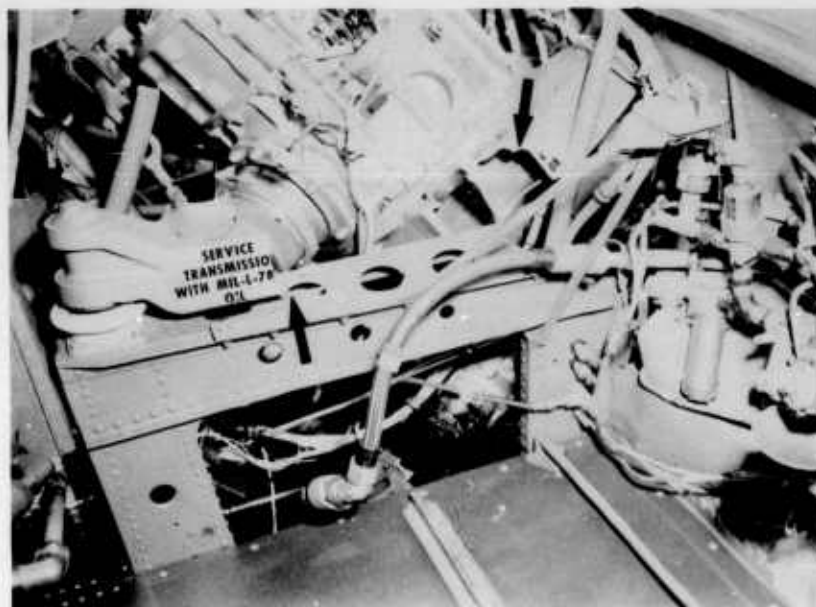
Note the fractures in the magnesium casting (arrows).
